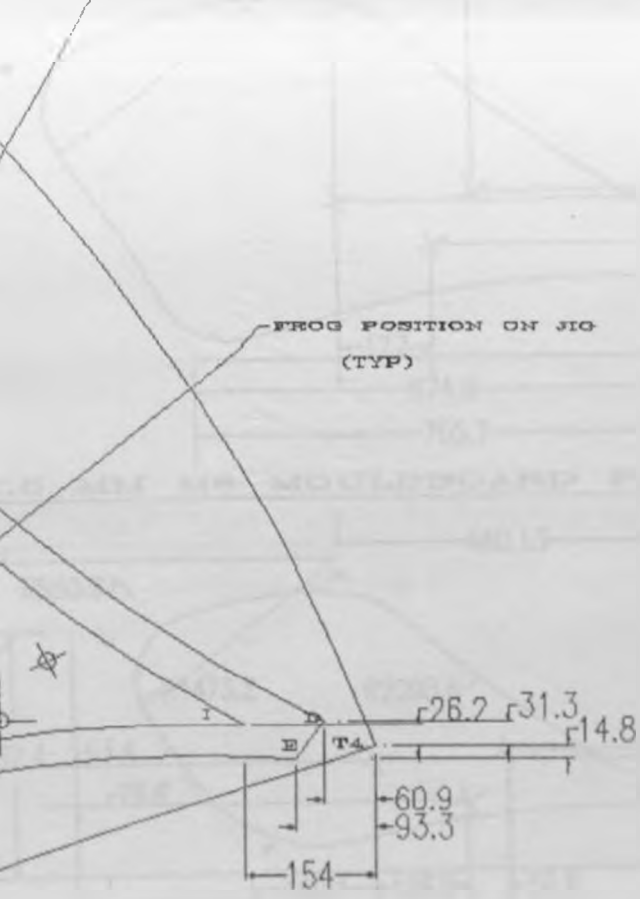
C: The Furrower Jig Plate Showing Marks of The Mouldboard and the Frog (Fig A.02A) After Filleting
